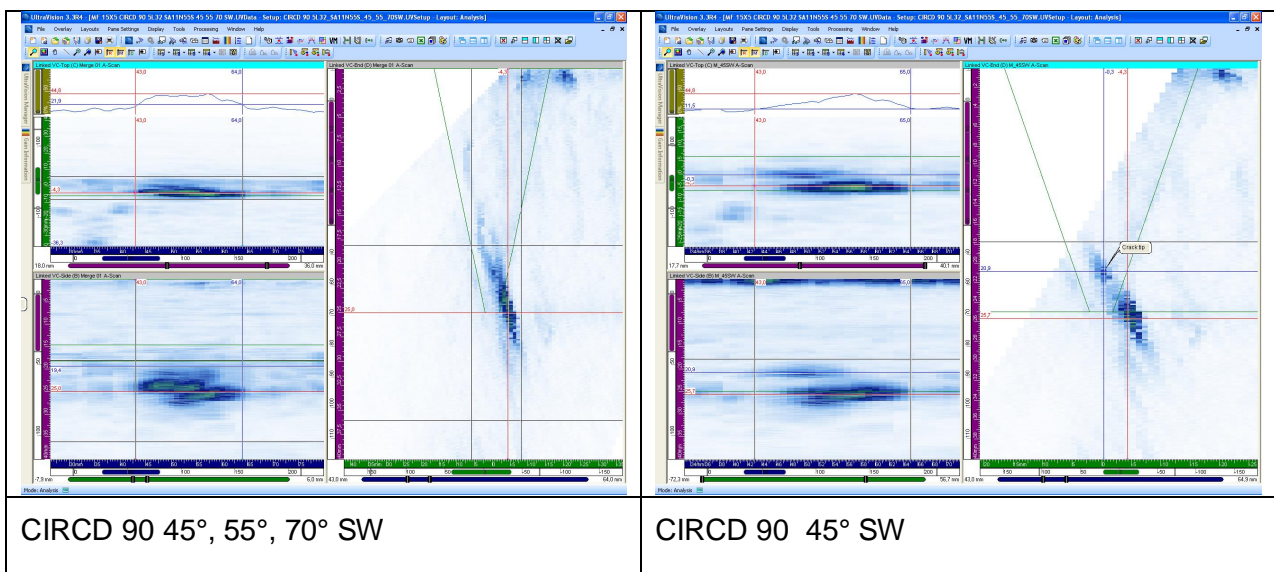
General views of weld MF scanned with technique PA-3.
